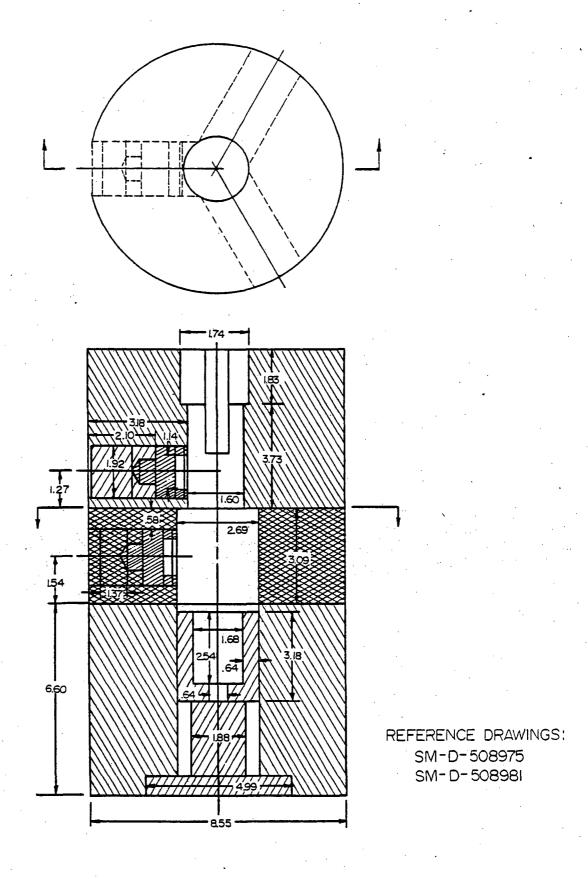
DISCHARGE WELL ASSEMBLY
